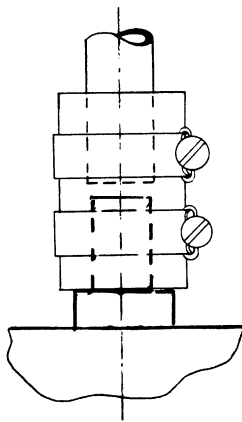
Optimum Location of Clamps to Minimize Area of Tygon Exposed to Vacuum
